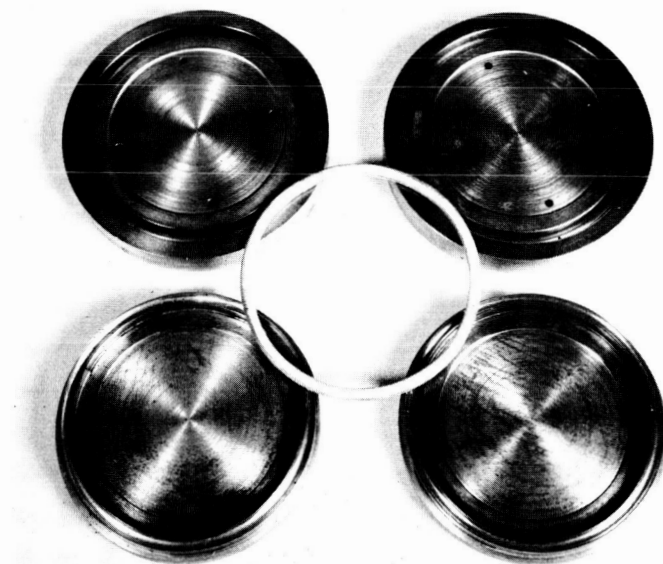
O-Ring Forming Tool and Encapsulation Tool Shown with a Fabricated O-Ring
